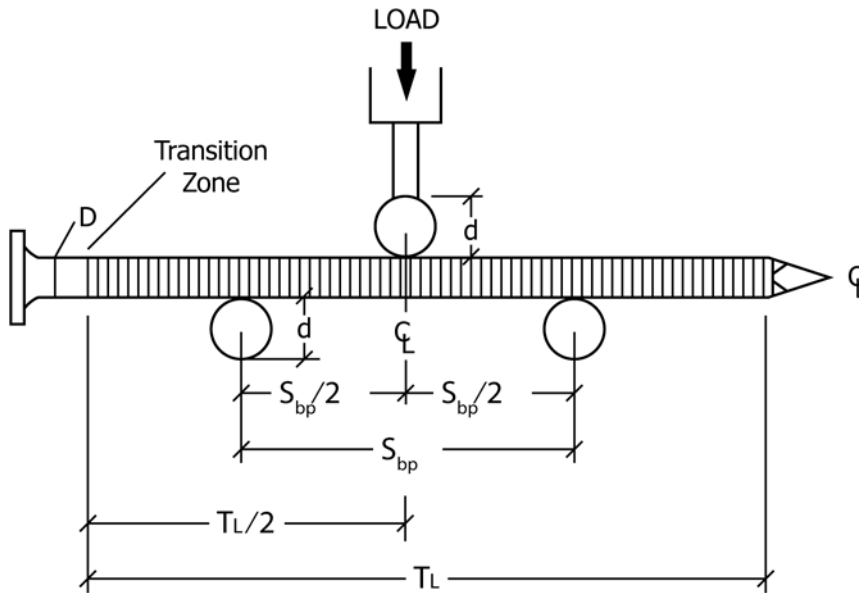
Load and Bearing Point Location for Partially Deformed Shank Nails with Insufficient Smooth Shank Length
